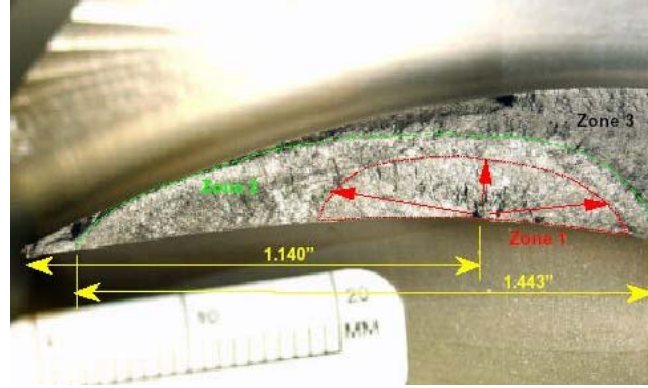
There are many common features in the fracture surfaces of the compressor blade from engine S/N FA0016 and the fracture surface from engine S/N FA0019 (see figure 19).
